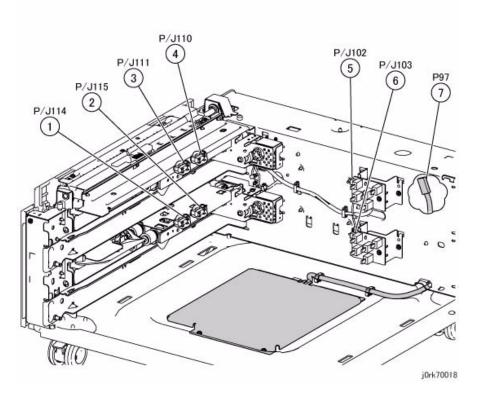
Feed Out Sensor, Paper Size Sensor, Heater
